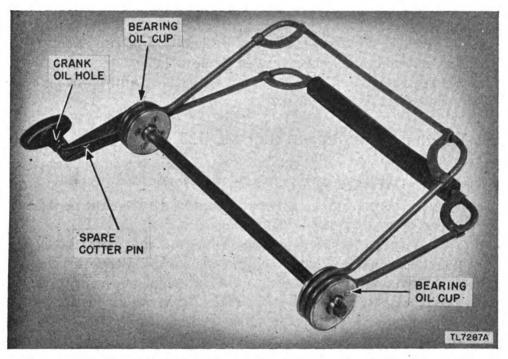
Reel RL-39, handle and axle assembly, lubrication points.
